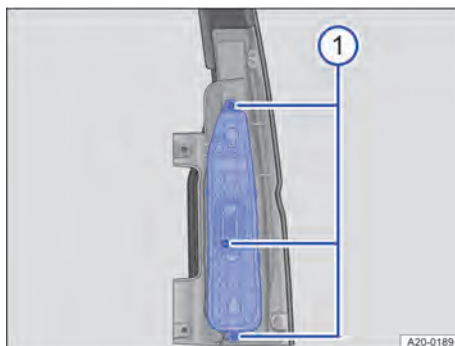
On the tail lamp cluster: removing the bulb holder.
